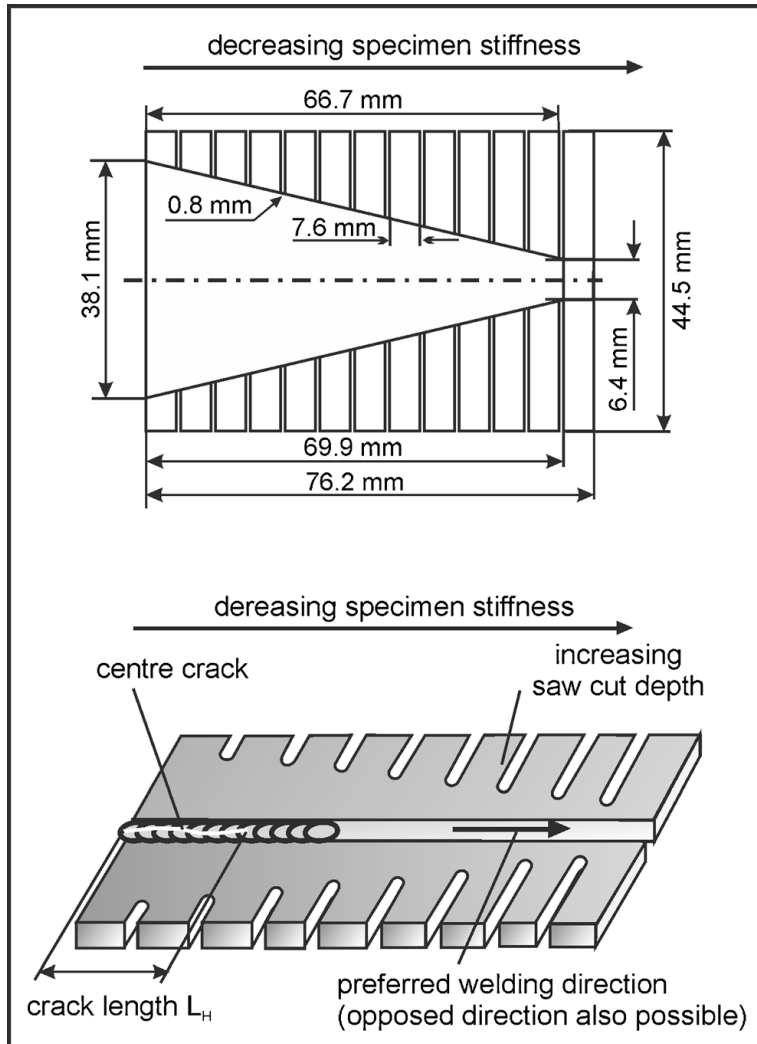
Schematic diagrams of Houldcroft cracking test specimen [10]
